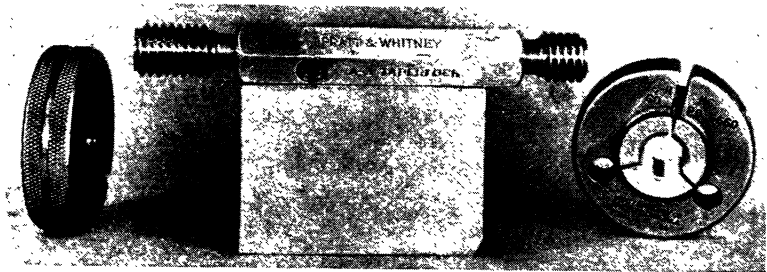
Thread plug and ring gages showing adjusting slots of ring gage.
